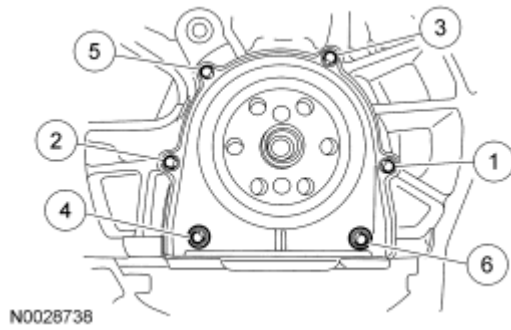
Identifying Tightening Sequence Of Crankshaft Rear Oil Seal Bolts
